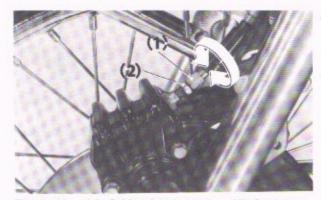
(1) Cable adjusting bolt (2) Lock nut
